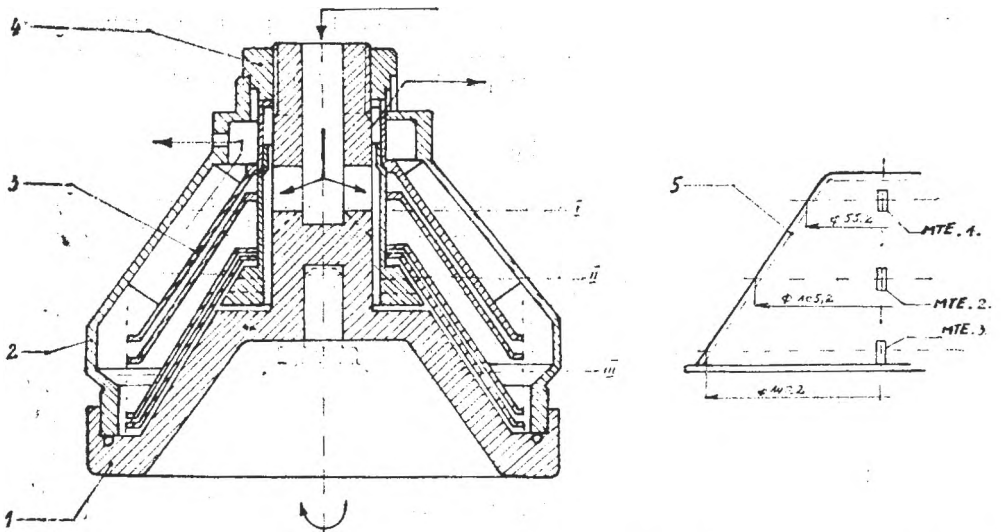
Rotor aggregate and disc set: 1 — bottom zone; 2 — head conical zone; 3 — disc set; 4 — upper ring for assembly; 5 — disc element.
